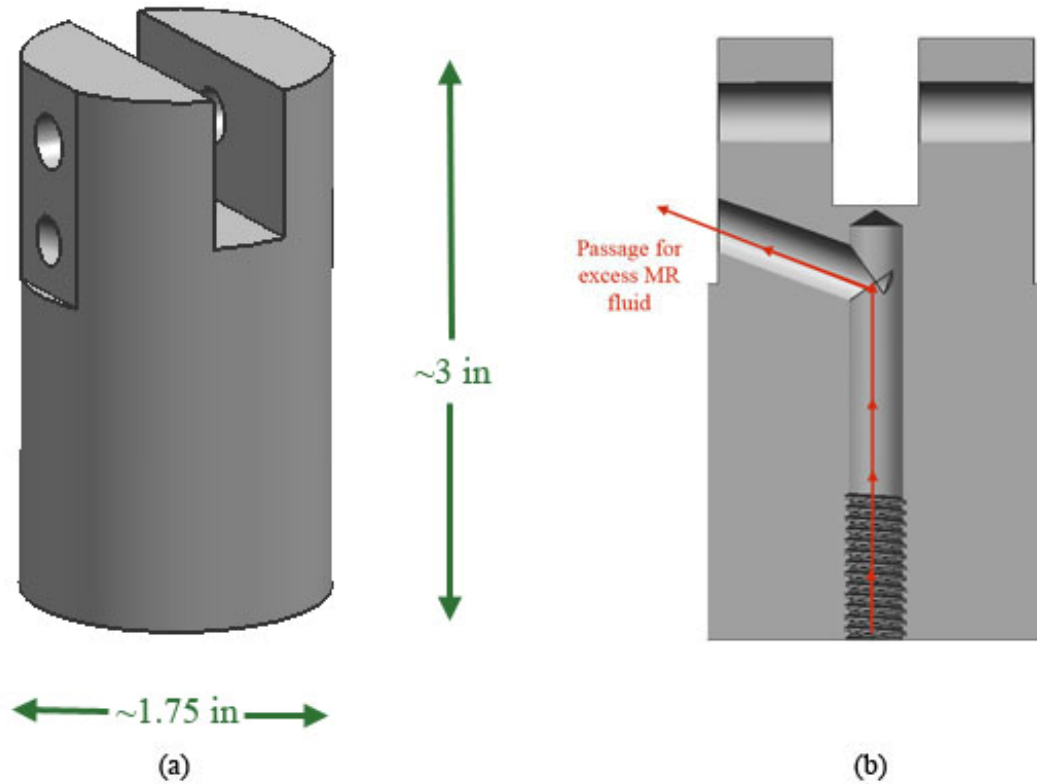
(a) The Piston Mount (b) Section view of the Piston Mount shows the passage for MR fluid
